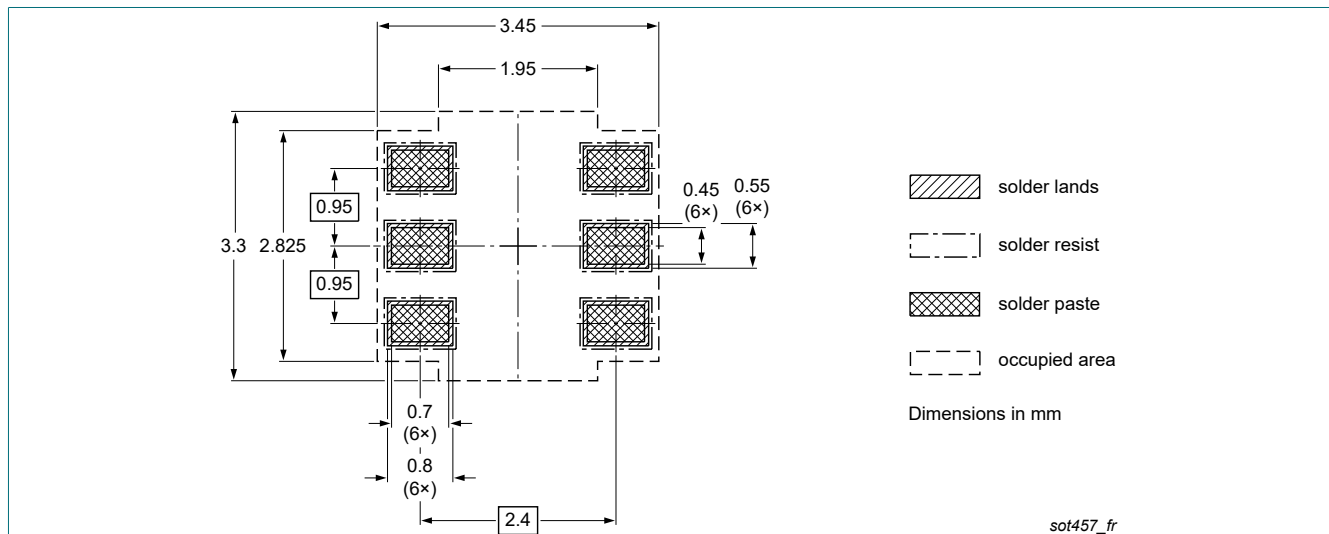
Reflow soldering footprint for TSOP6 (SOT457)
